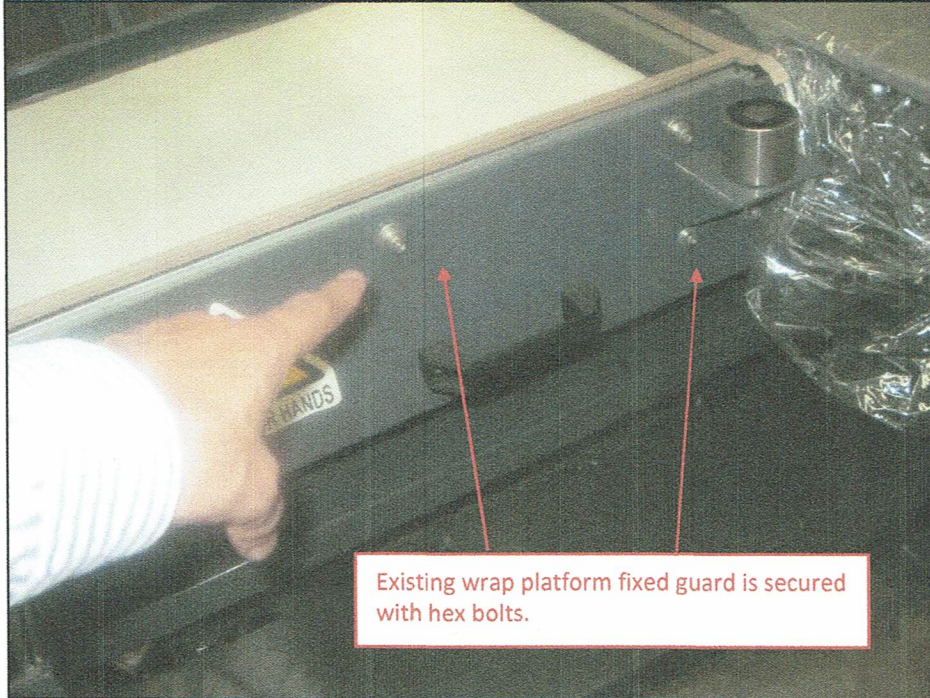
XEKL 455 MT: Fixed guard on front of wrap platform
